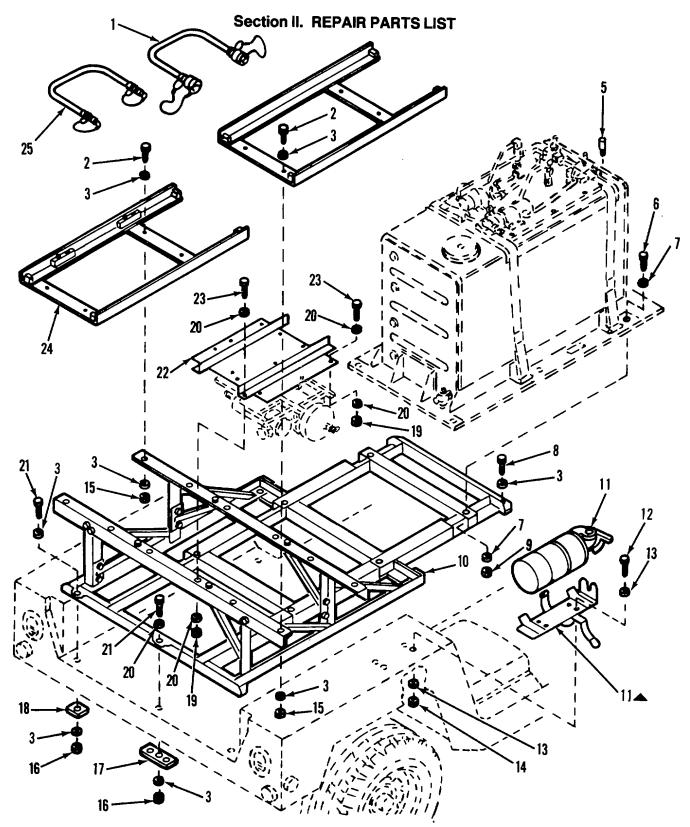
M284 Smoke Generator Mounting Kit (Frame Assembly and Mounting Hardware).
